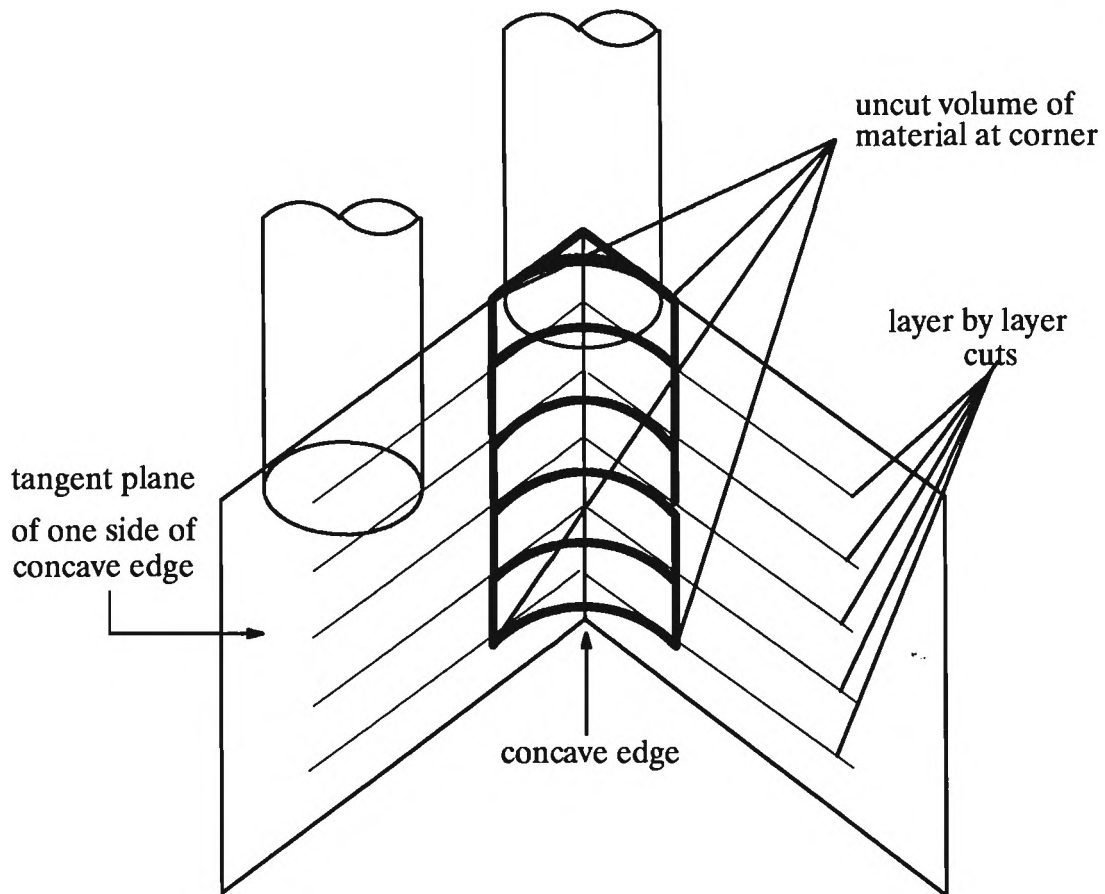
Isometric view of uncut material in cavity machining at concave edges
